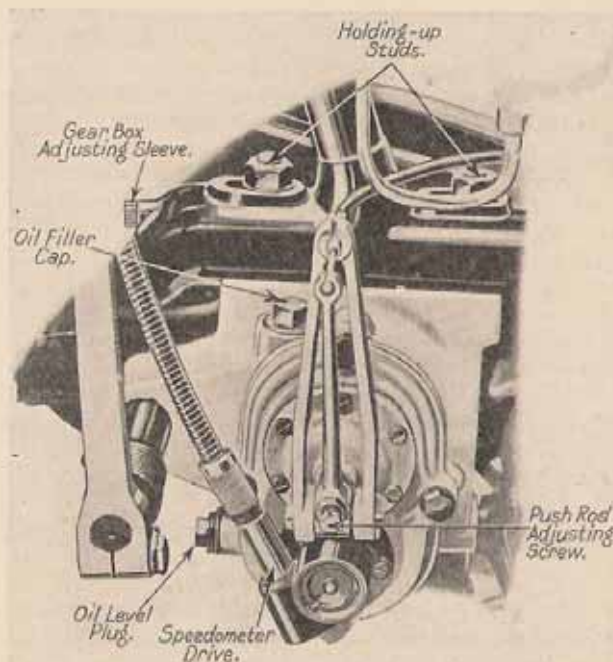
SHOWING CLUTCH OPERATION AND SPEEDOMETER DRIVE
